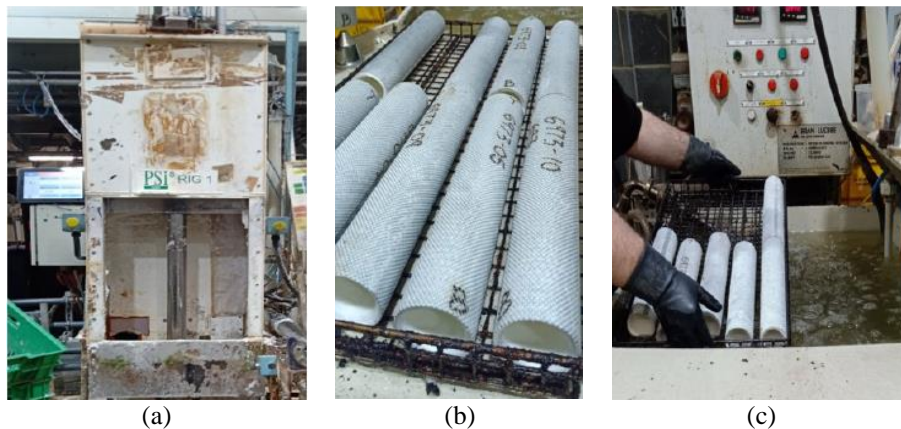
Fibrous filter moulding process: (a) Injection rig, (b) Moulded tube, and (c) Resin impregnation
